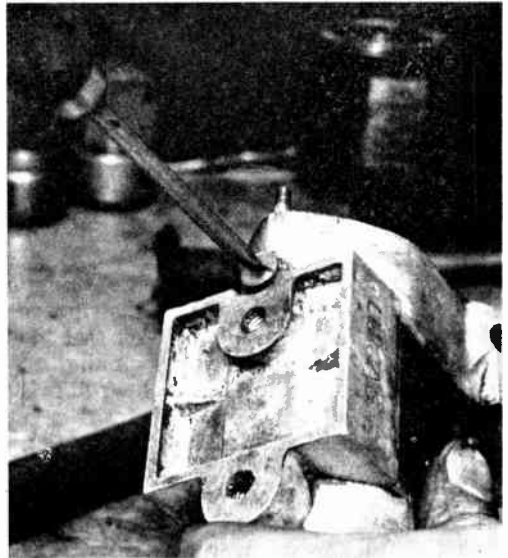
THE NEXT STEP IN DISMANTLING A MOTOR CAR MAGNETO.
